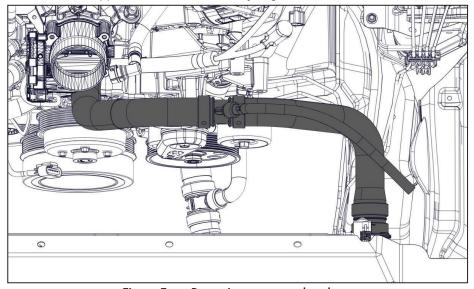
Removing upper coolant hose (The Tee may not be present on some trim levels)
